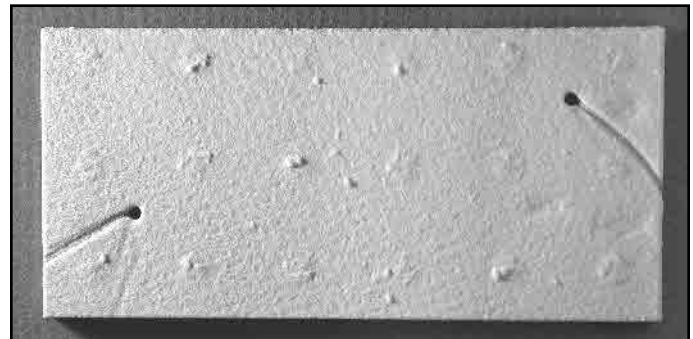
CVI SiC/SiC coupon after EBC is applied showing obvious surface asperities due to tool bumps.
